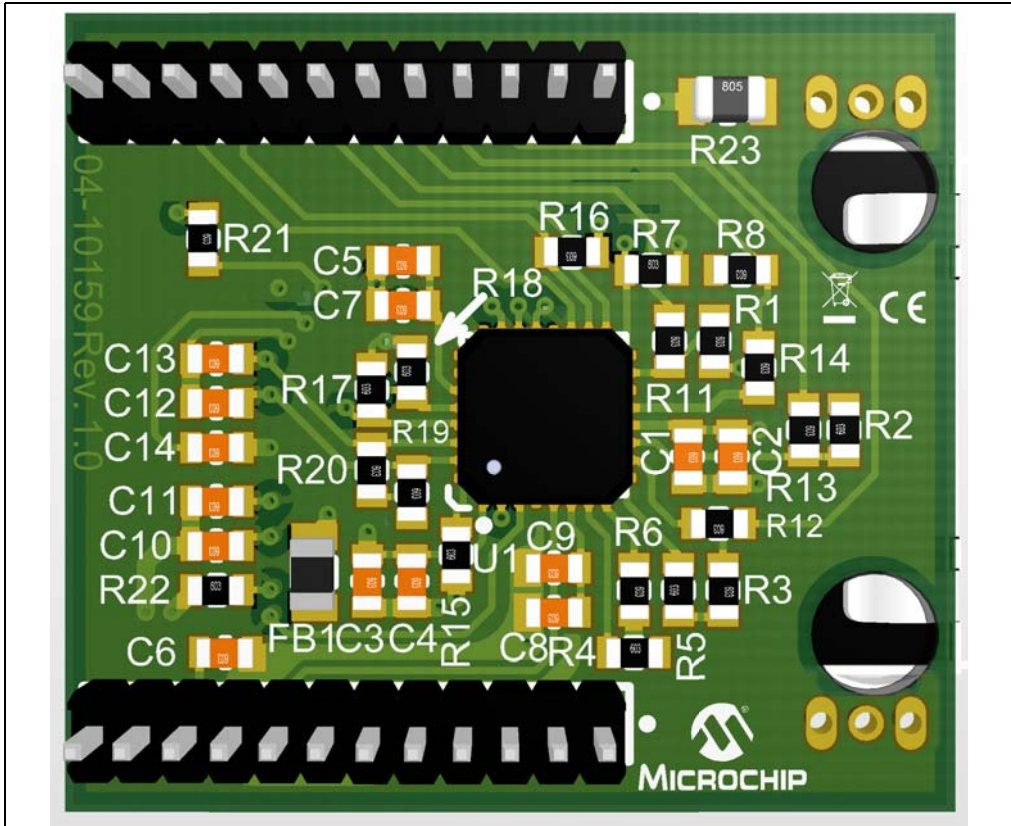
DAUGHTER BOARD LAYOUT (BOTTOM VIEW)
